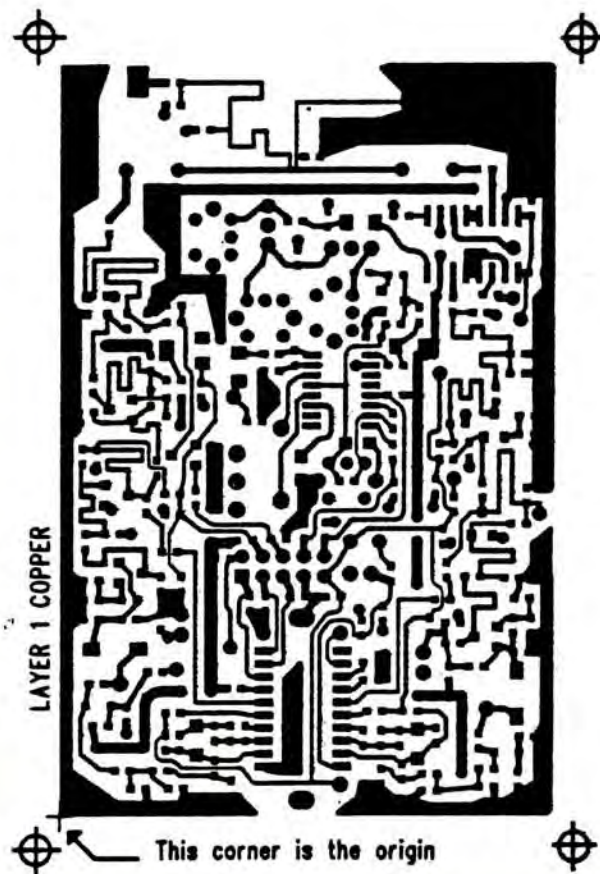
PCB layout of a mobile phone (radio front-end)
